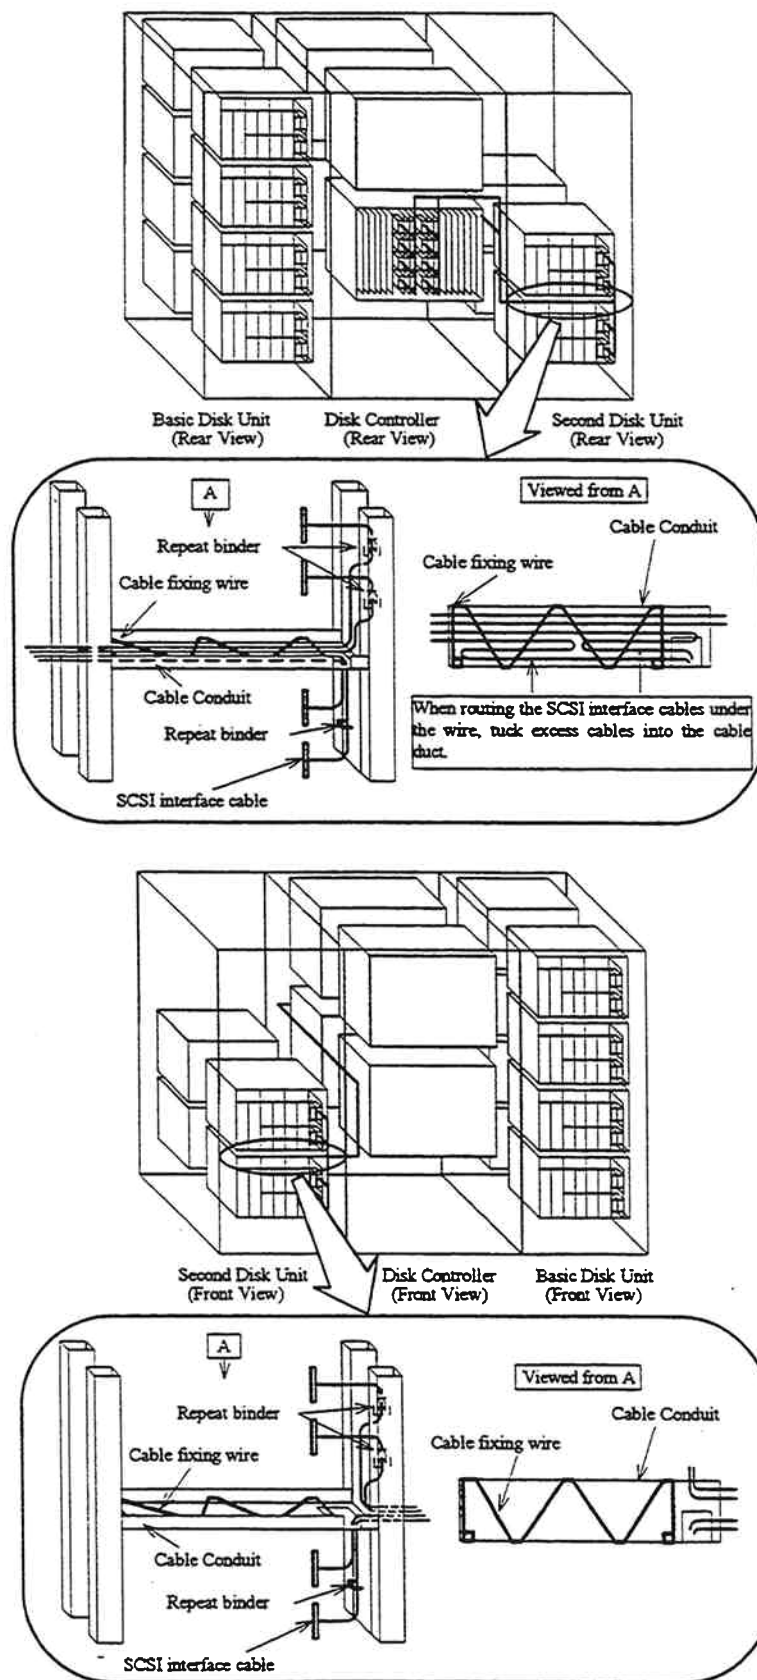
Fixing of SCSI Interface Cables
